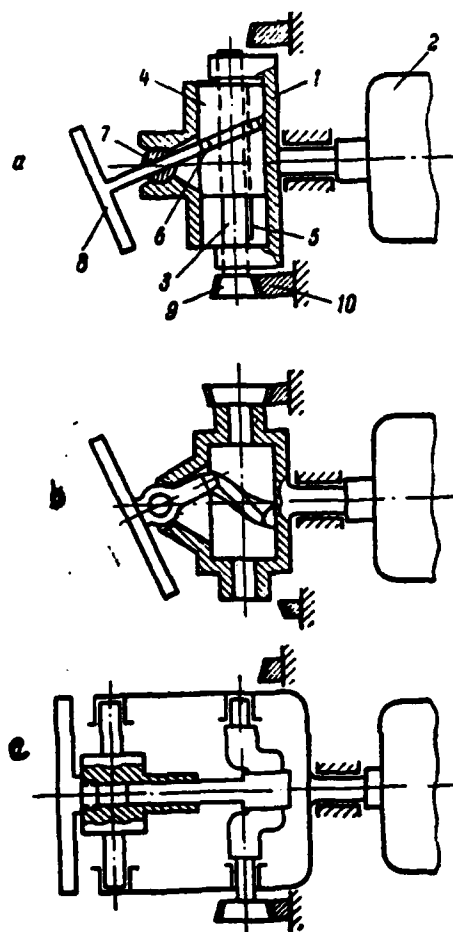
Different types of the drives of the scanning platform, which accomplishes the vibrational-rotational trajectories of motion with the aid of the mechanism of the flat/plane wobble plate (a), three-dimensional/space cam gear (b), a flat-crank mechanism (c).
